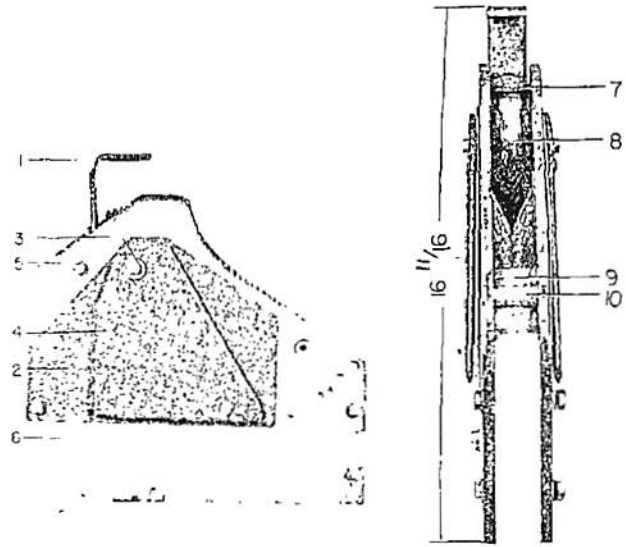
Current Trip Assembly NS-9 Solenoid Mechanism
